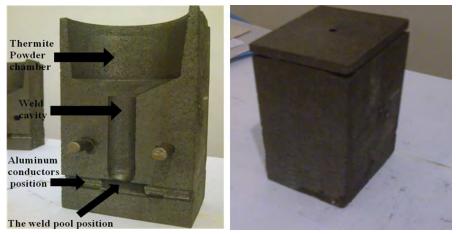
Graphite mould used for thermite welding of aluminum conductor.
